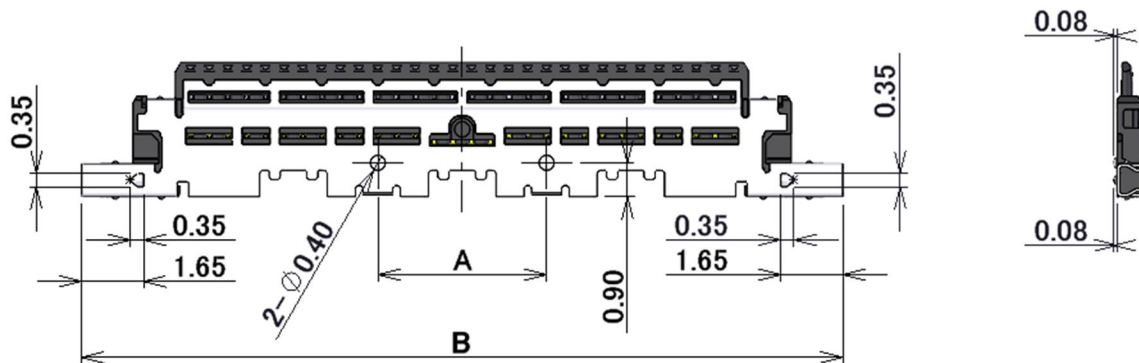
The Shell Bottom Side of Plug Housing Assembly
